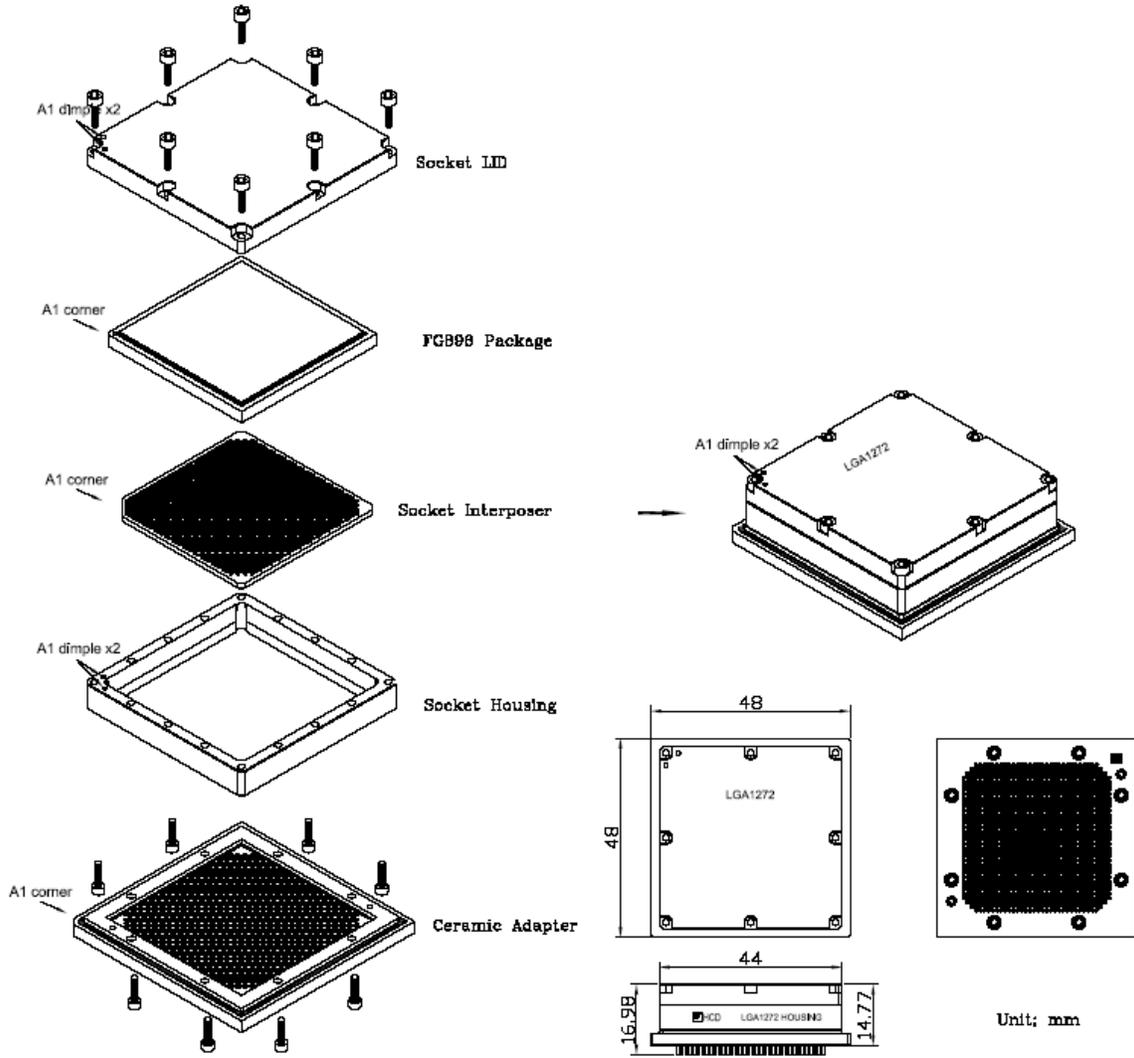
• Placing and Tightening Socket Lid Using Eight Screws and Optional Alignment Pins
